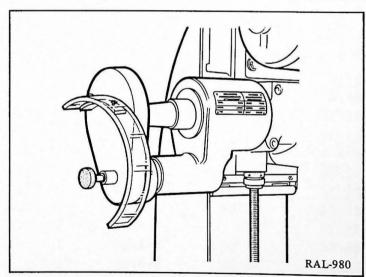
INTERNAL GRINDING ATTACHMENT
